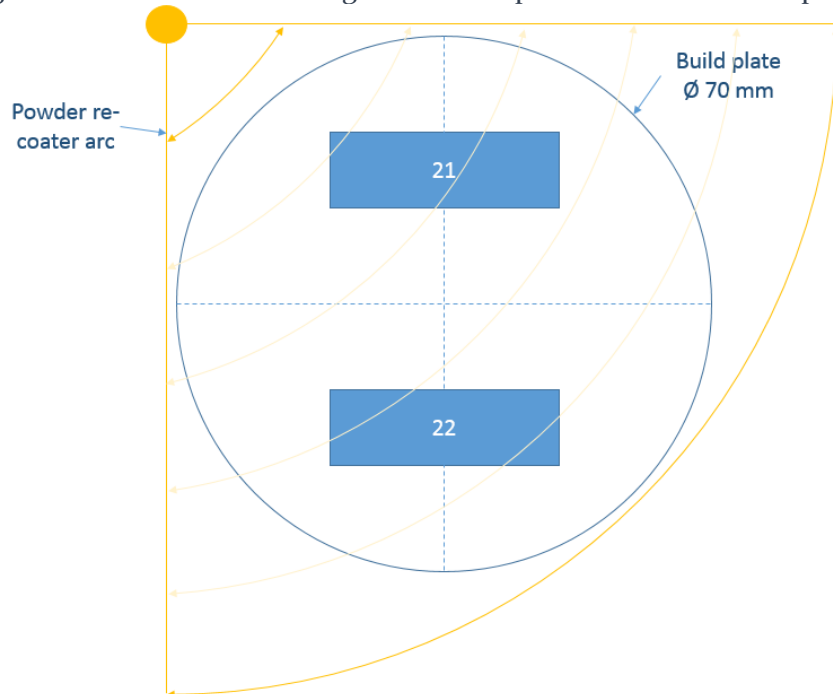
Schematic showing build positions for oblong test pieces.
